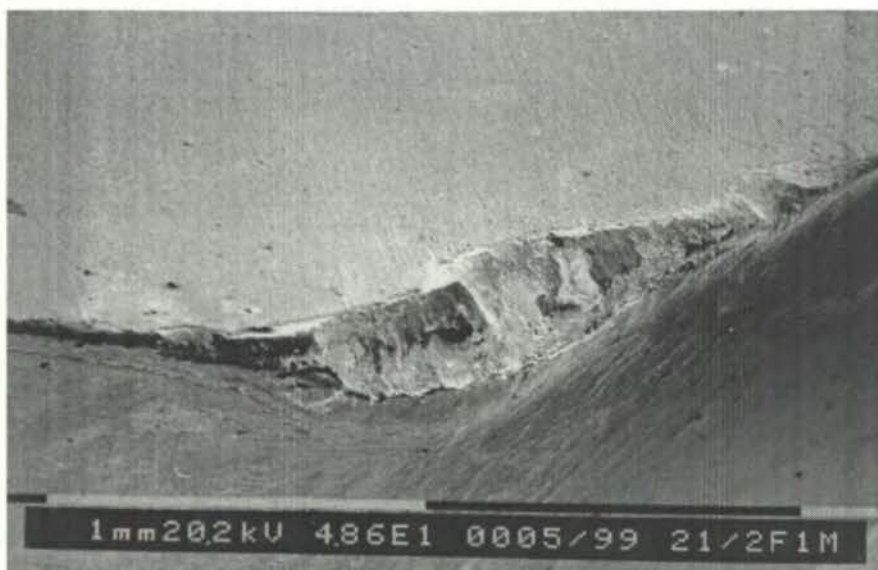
92 Premature failure due to severe breakage of KC994M tool after 1 minute when cutting Waspaloy at 50 m/min and 0.08 mm/tooth
